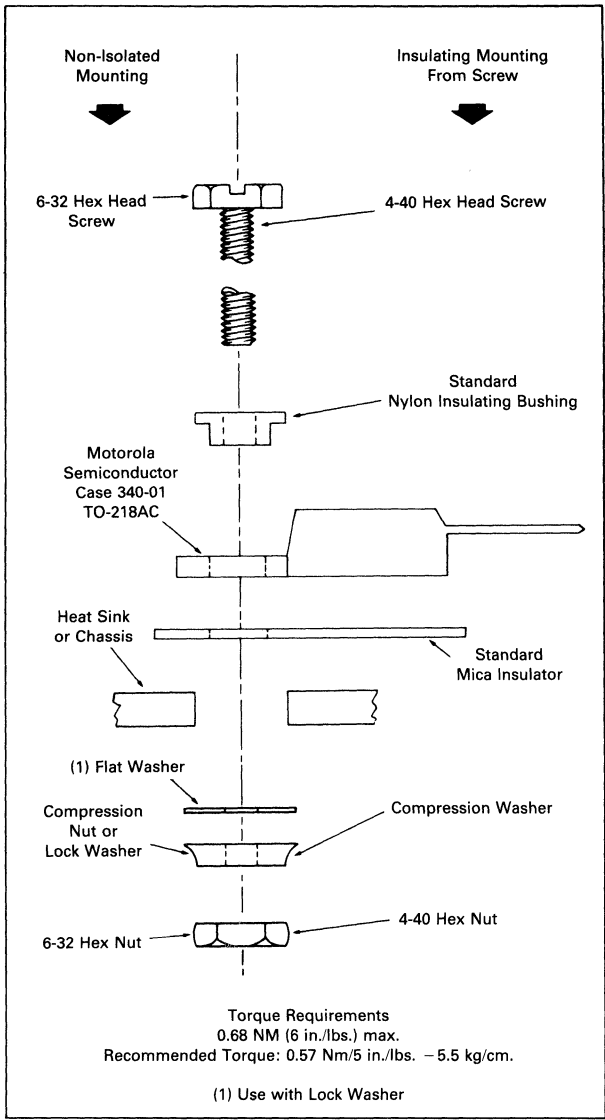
MOUNTING METHODS FOR TO-218AC PACKAGE
